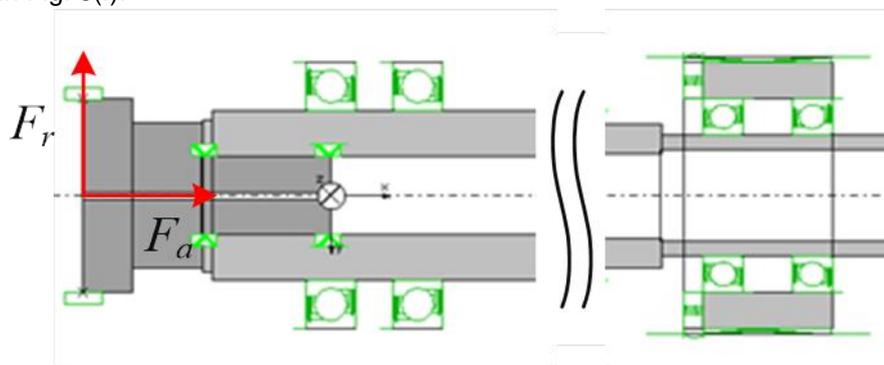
Bearing arrangements of motorized spindle (not to scale)
